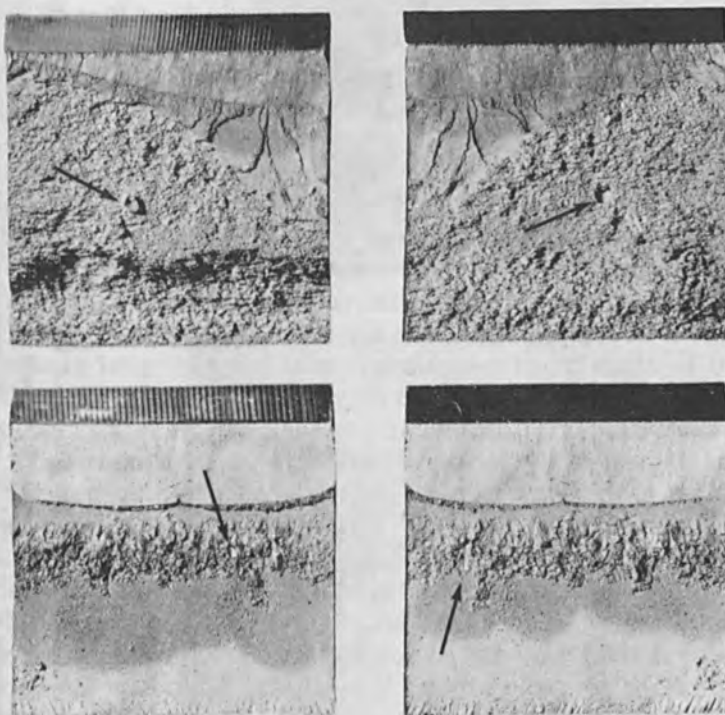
Fracture Surfaces of Notch Bend Fracture Toughness Specimens from Weld RW 33 Showing Small Areas of Cold Shuts.
